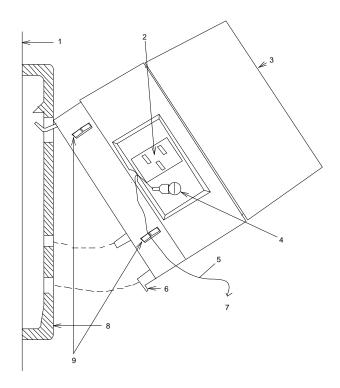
1145B1/1146B1 Mounting Arrangement
